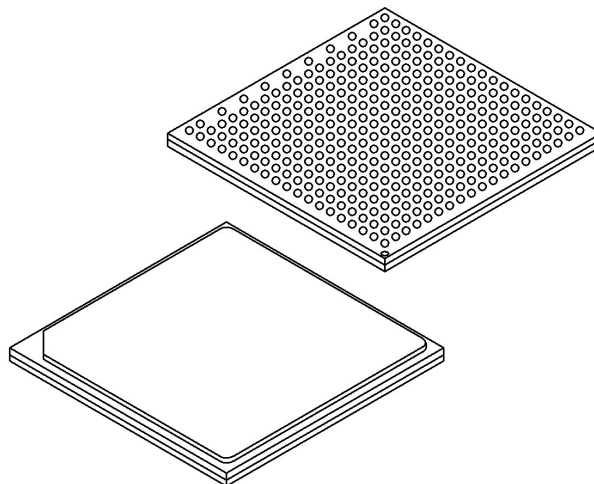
353-FCCSP PACKAGE (DIMENSIONS)
